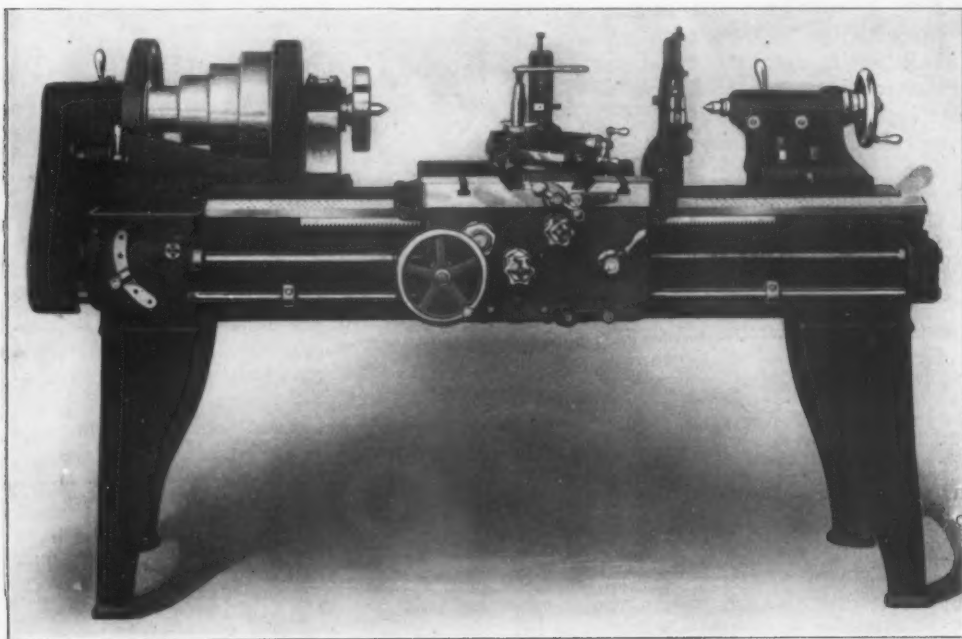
The 15-In. Heavy Standard Engine Lathe, Built by Greaves, Klusman & Co., Cincinnati, Ohio.
